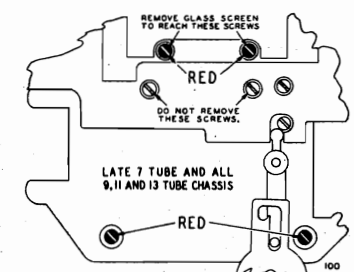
Location of 4 Red Mounting Screws in Late Models
